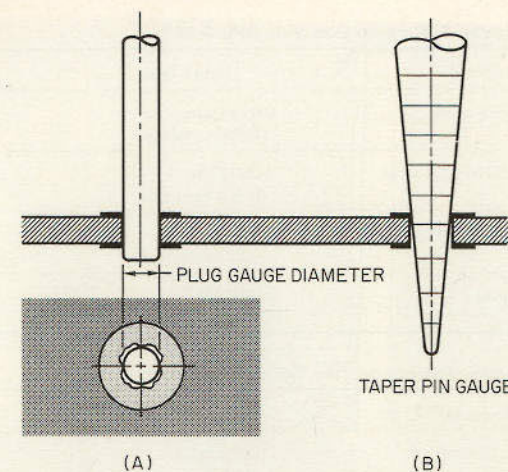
Hole-measuring methods: (a) Drill blank plug method, and (b) Kwik-Chek or taper pin method of measuring the hole diameter (Sandia Laboratories).
